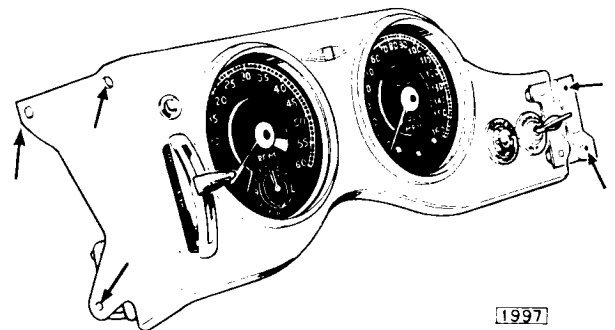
Location of the side facia panel attachment points (Right hand drive).
